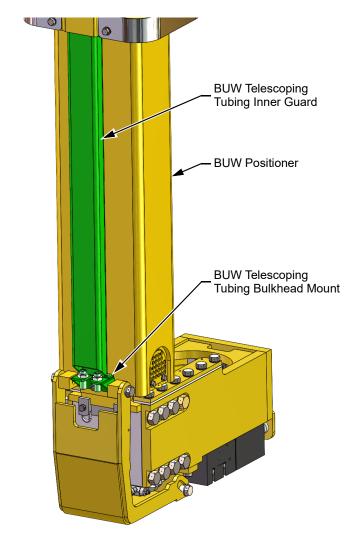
BUW Telescoping Tubing Inner Guard & Bulkhead Mount
